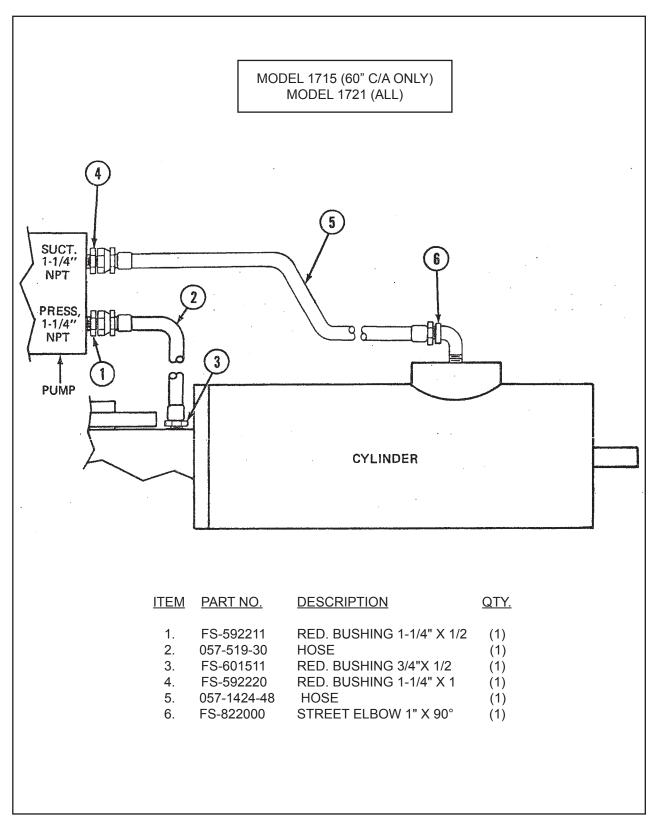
Hydraulic Lines (Sheet 1 of 4)
